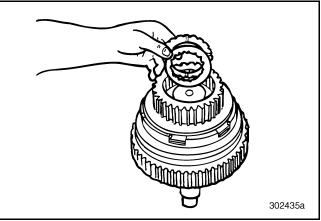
Installing Thrust Washers (T313L21/T318L21 Shown)
